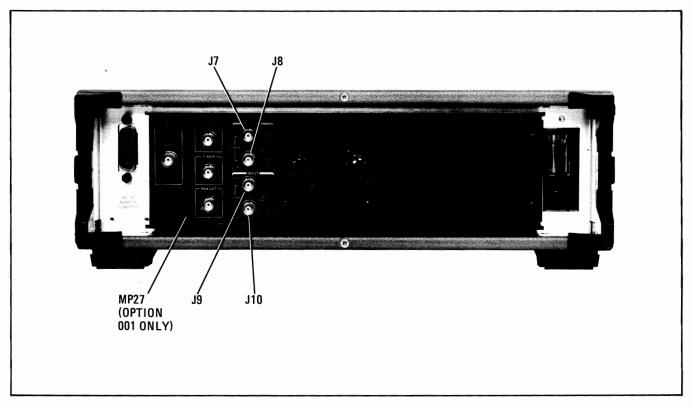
Chassis and Mechanical Parts Identification — Rear Panel, Including Option 001
